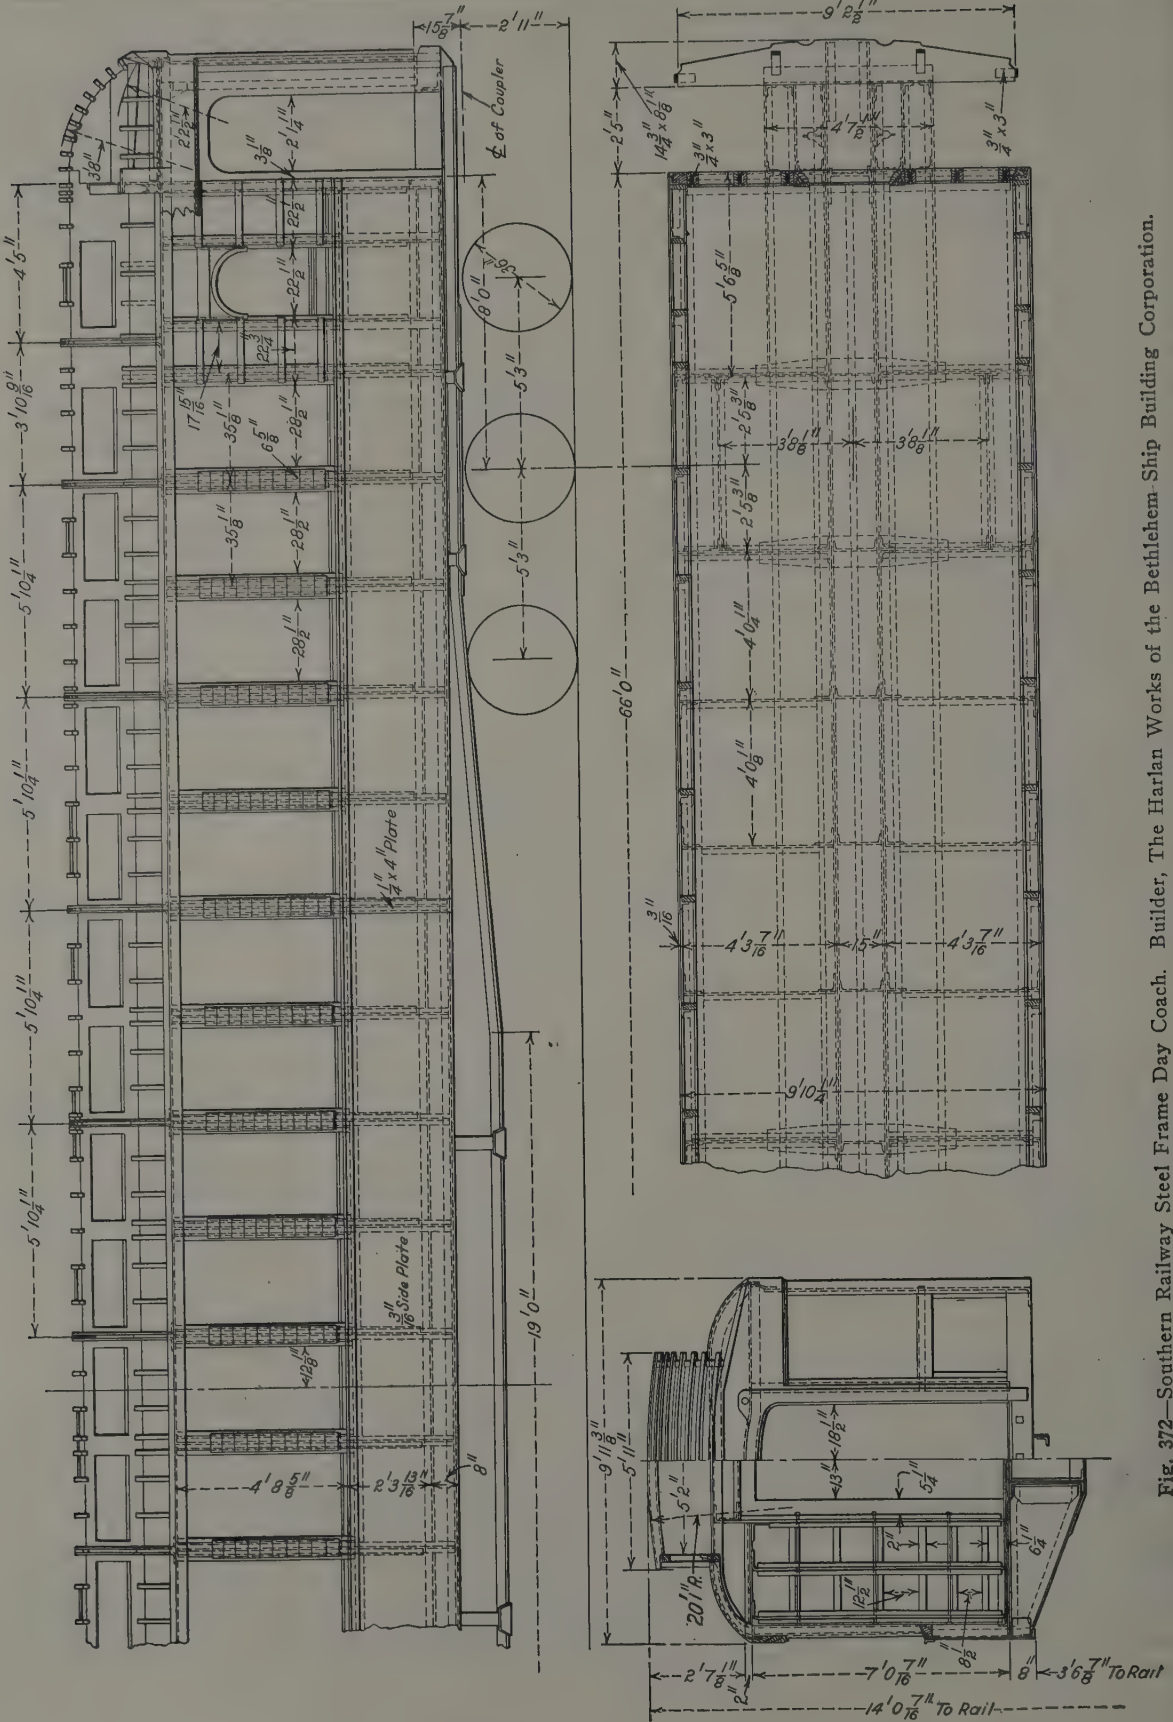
Southern Railway Steel Frame Day Coach. Builder, The Harlan Works of the Bethlehem Ship Building Corporation.
